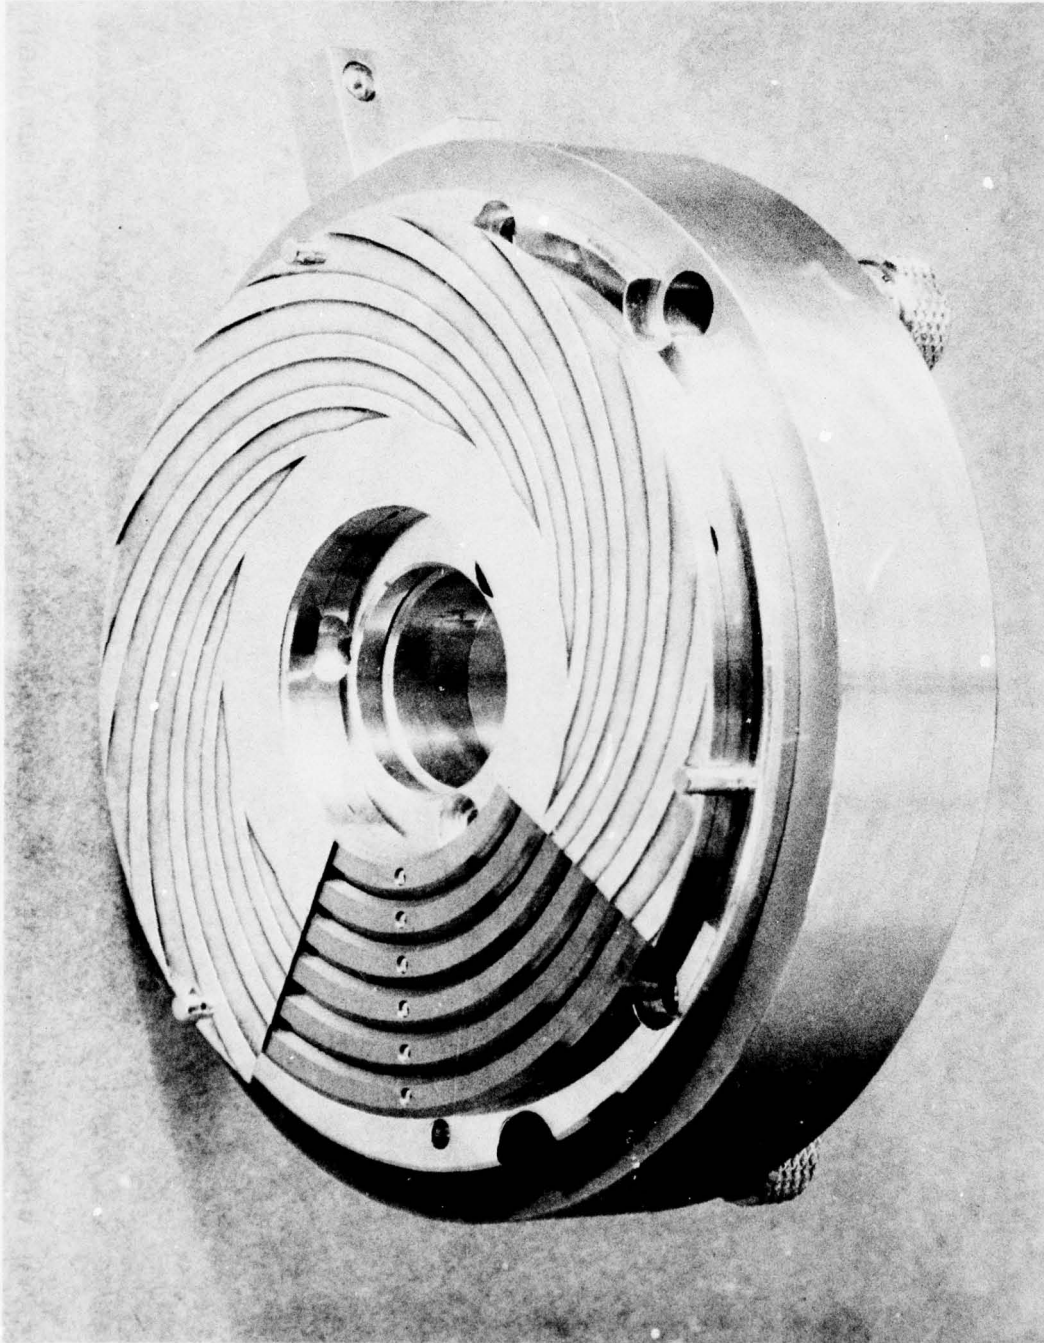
VIEW OF FLEXIBLE THRUST BEARING LLF-1T WITH SECTOR OF SPIRALLY GROOVED MEMBRANE REMOVED
